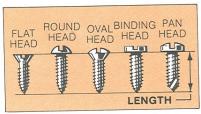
Self-tapping sheet-metal screws are used to fasten materials to metal surfaces.
